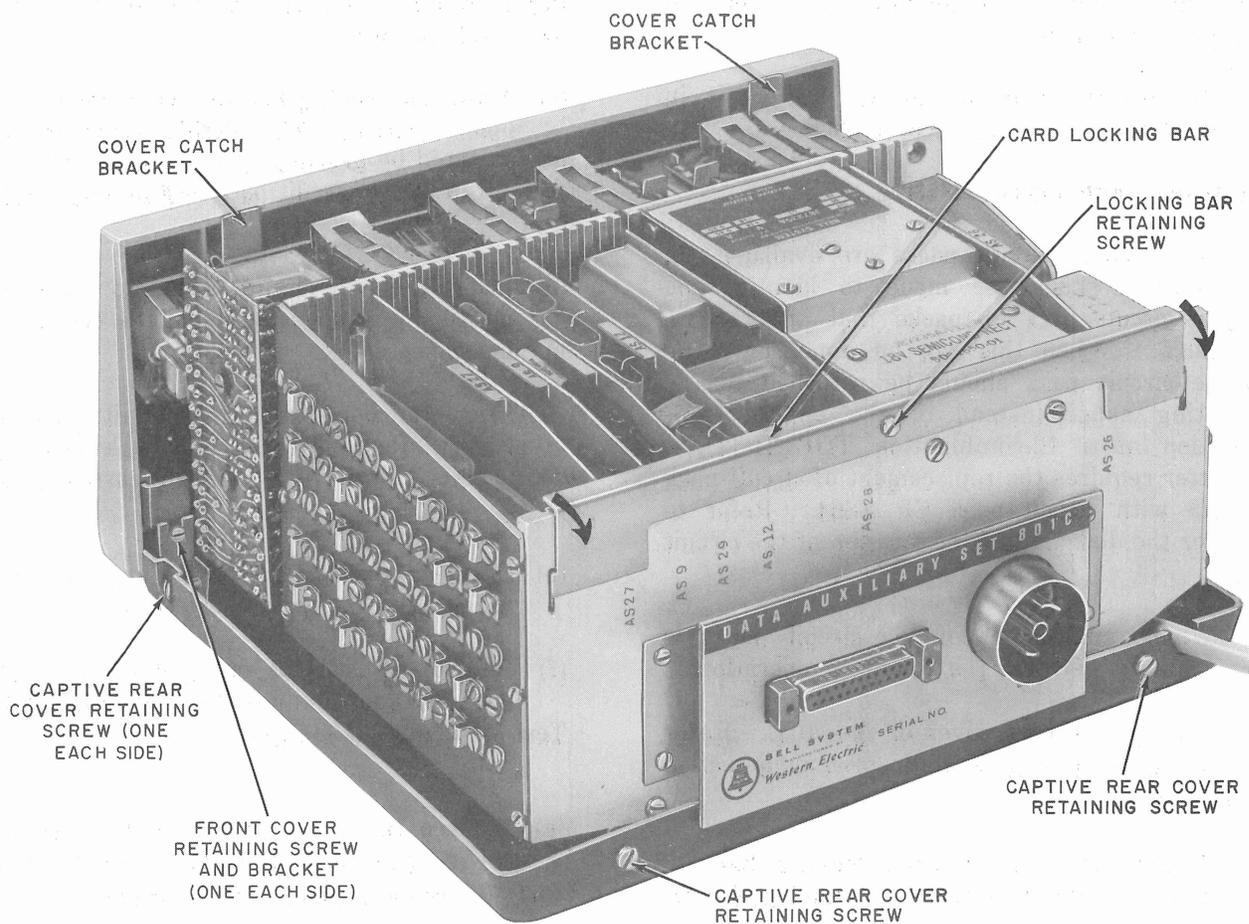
Data Auxiliary Sets 801C3 and 801C4—Covers Removed
